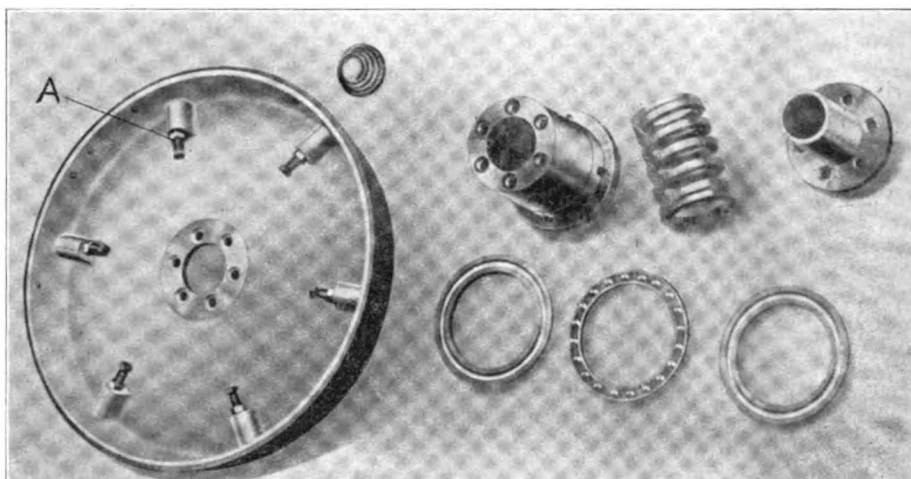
SPRINGS THAT EASE ACTION OF KISSEL CONE CLUTCH
